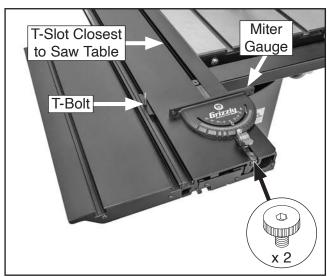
Miter gauge and pivot knob T-bolt installed on sliding table.
